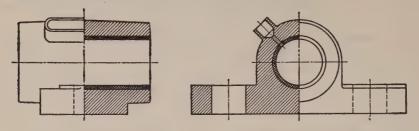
Solid Journal Bearing, Cast Iron, Babbitt Lined.
